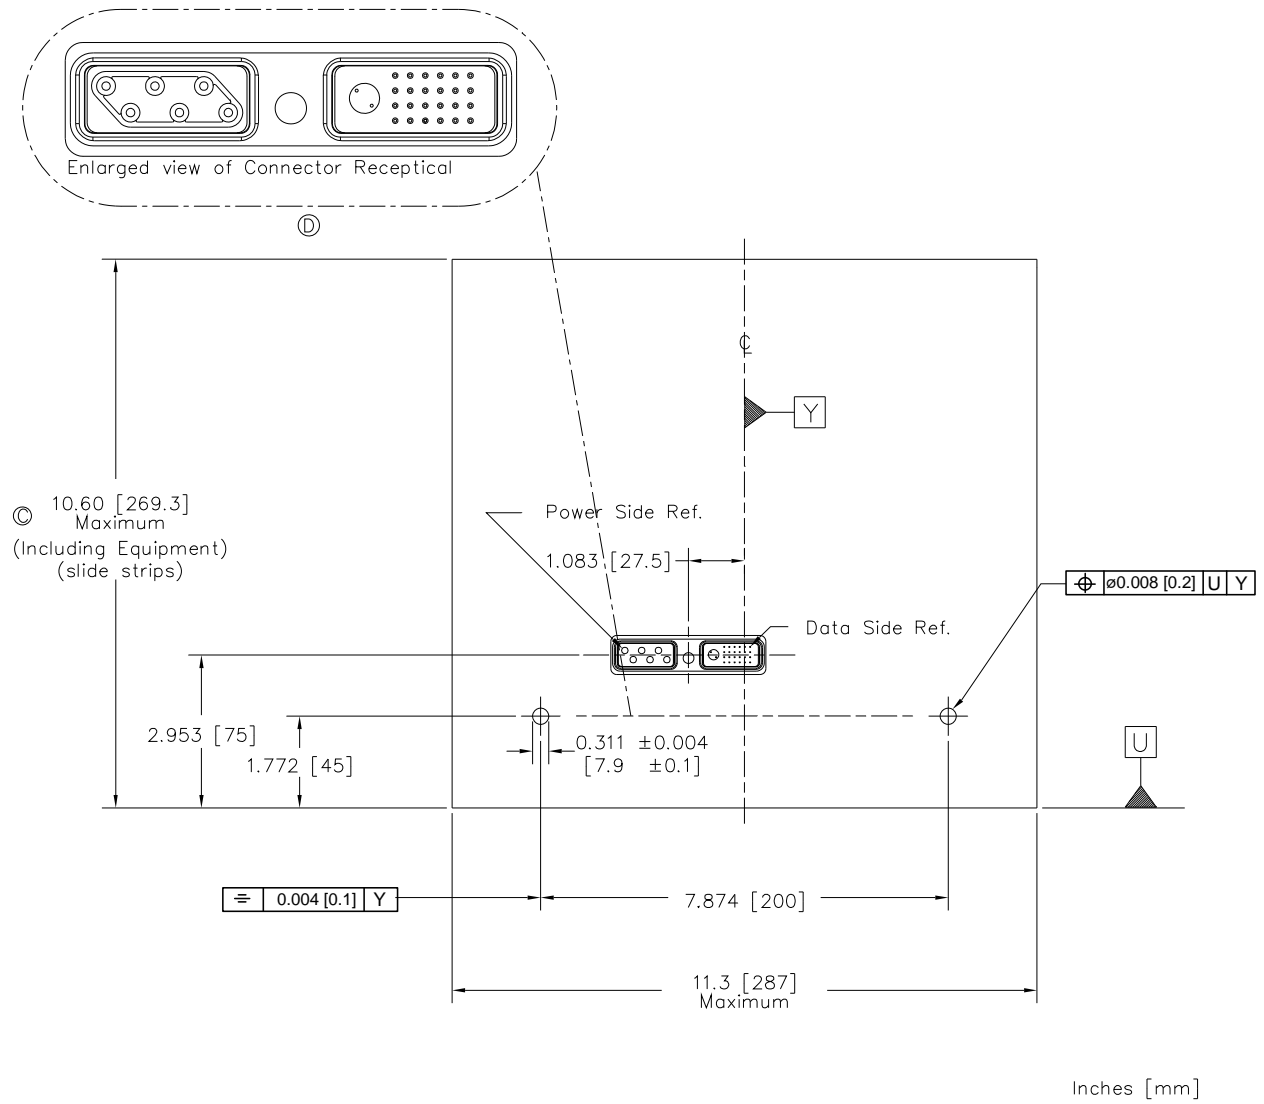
C – GAIN Size 5 Compartment Structural and Systems Interface Drawing – Plan View
